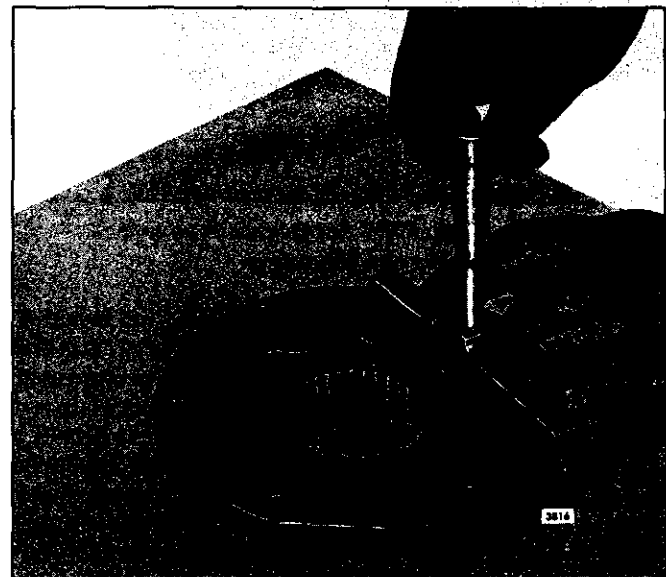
Measuring Clearance from Face of Pump Body to Side of Rotor
